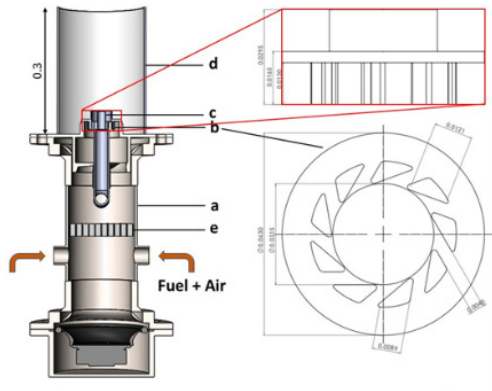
Detailed geometrical view of the burner. Dimensions in meter(m)[open access, 38]
